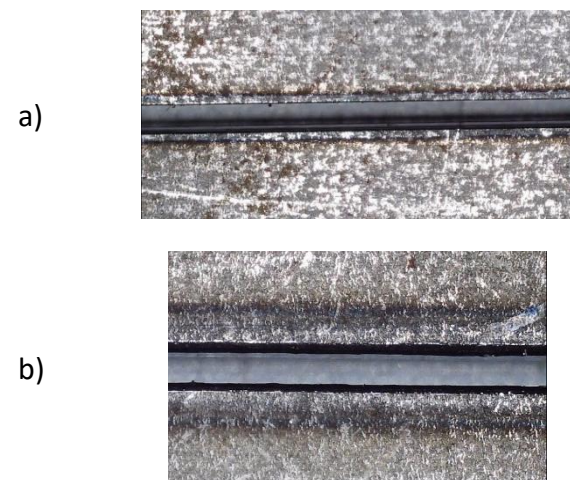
Microscope pictures for oxidation mark measurement: a) upper plate surface, b) lower plate surface
